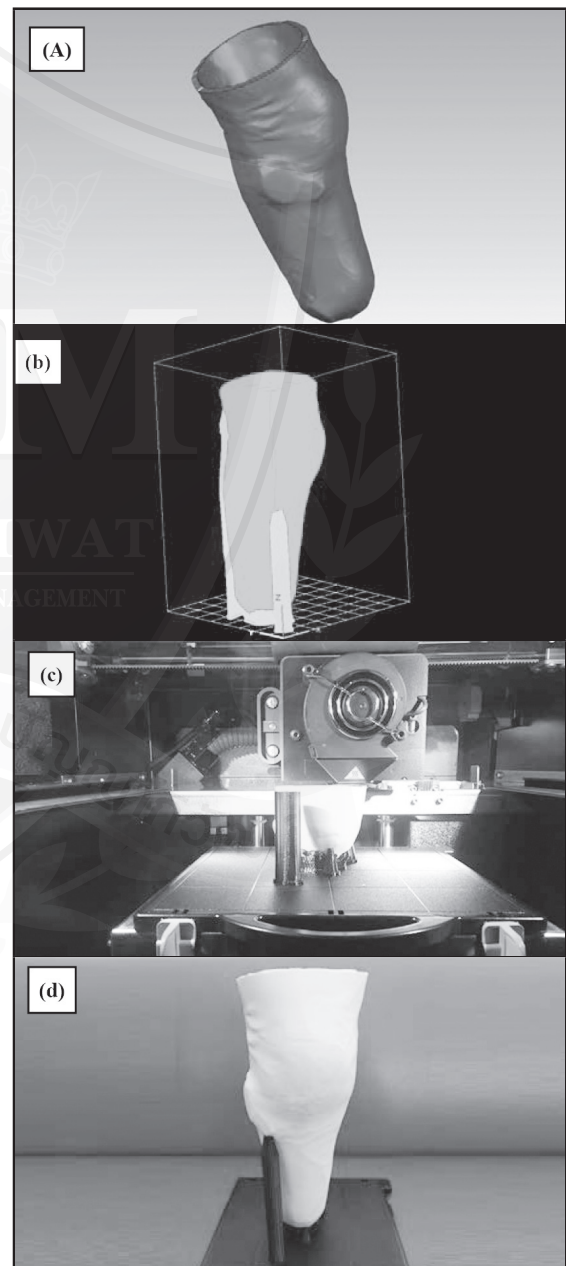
Fig. III. Stump positive mold fabrication: (a) surface model with thickness of 3 mm, (b) part's orientation and support structure, (c) part in FDM machine, (d) finish fabricated part.
